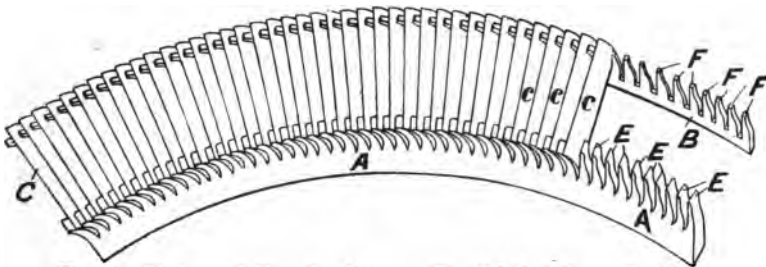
Blades and Shrouds of Parsons Parallel-flow Steam Turbine.
